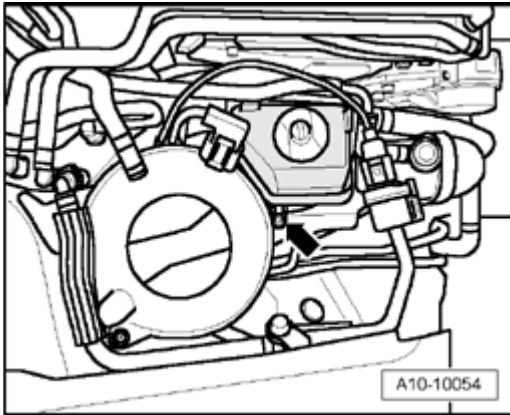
Removing Securing Bolt For Power Steering Reservoir
